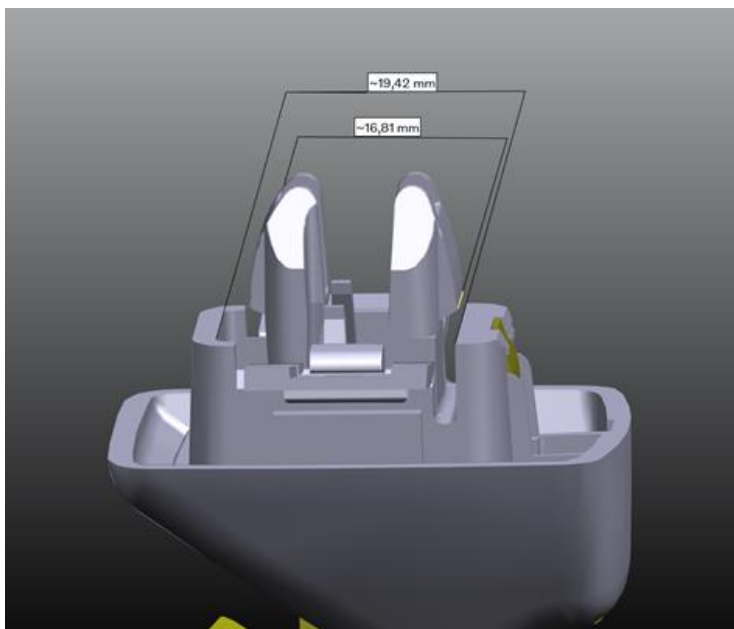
CAD illustration of the support bearing showing the measure for the lock pins.
